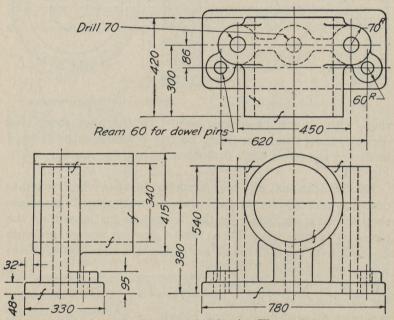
A metric drawing (front cam shaft bearing, Hispano-Suiza aero-engine).
